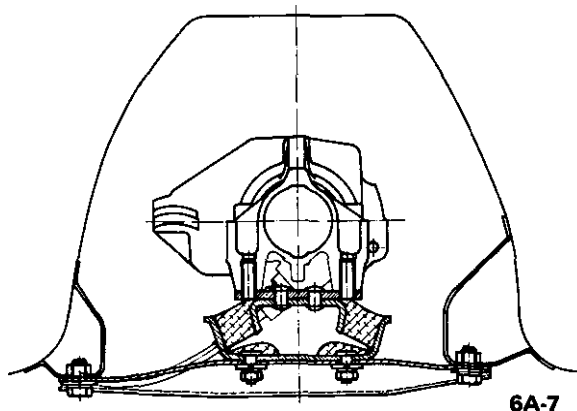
A-7 Transmission Support Bolts • Opel 1900 and Manta Series
